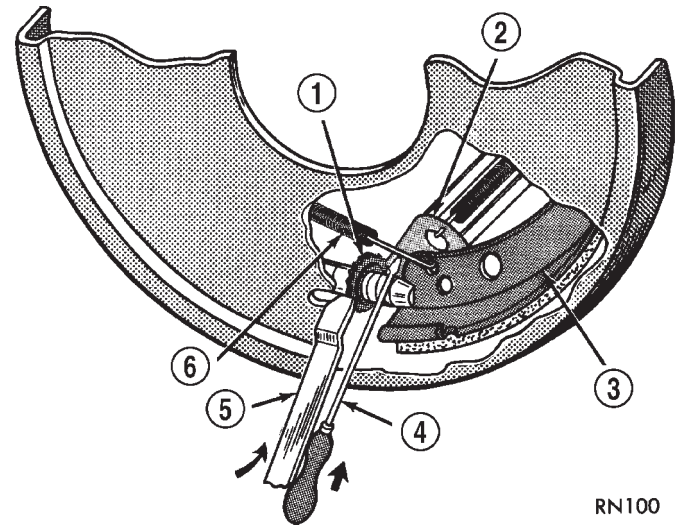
ADJUSTING GAUGE ON BRAKE SHOES
